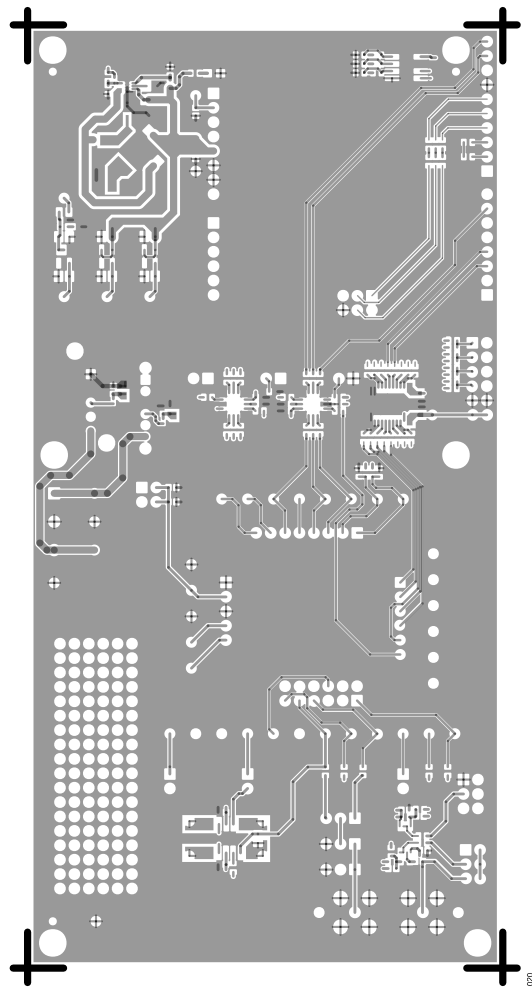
EVAL-MB-LV-ARDZ Board Layout L1 Primary
